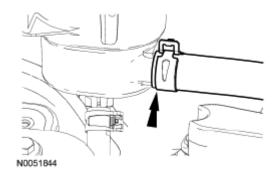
Locating A/C Suction Tube Safety Clip Courtesy of FORD MOTOR CO.
